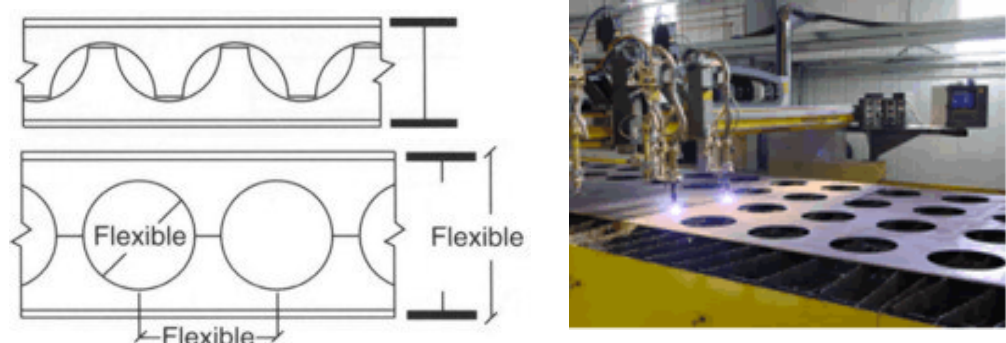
(left) Cellular beam manufactured from cutting and expanding a standard universal beam (Westok). (right) Cellular beam fabricated from steel plates cut and welded (Fabsec Ltd.)
